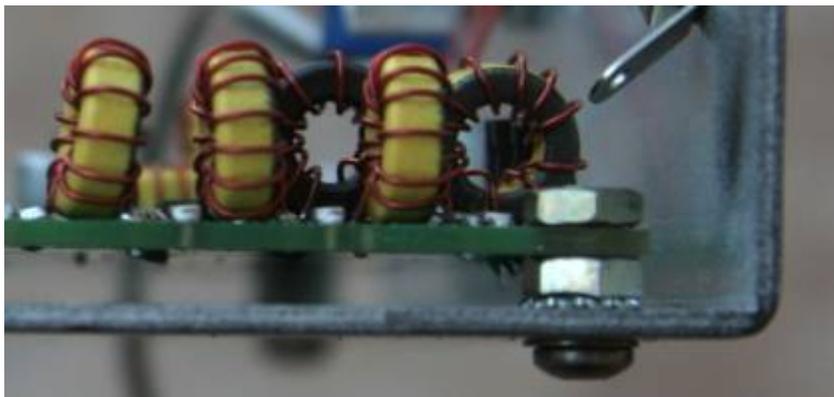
Mount all four corners of the main board using the mounting hardware as shown.
